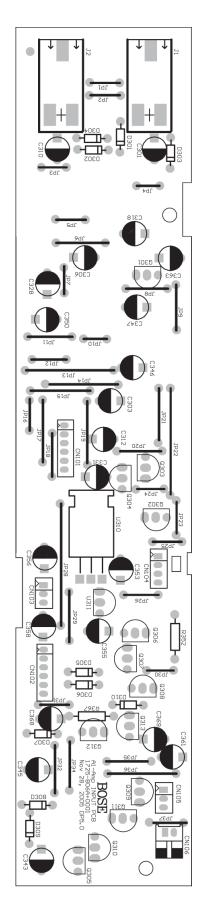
Input/Limiter PCB (RoHS) Bottom Side Etch Layout
